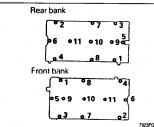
Rocker cover bolt torque sequence-Diamante 3.0L DOHC engine
